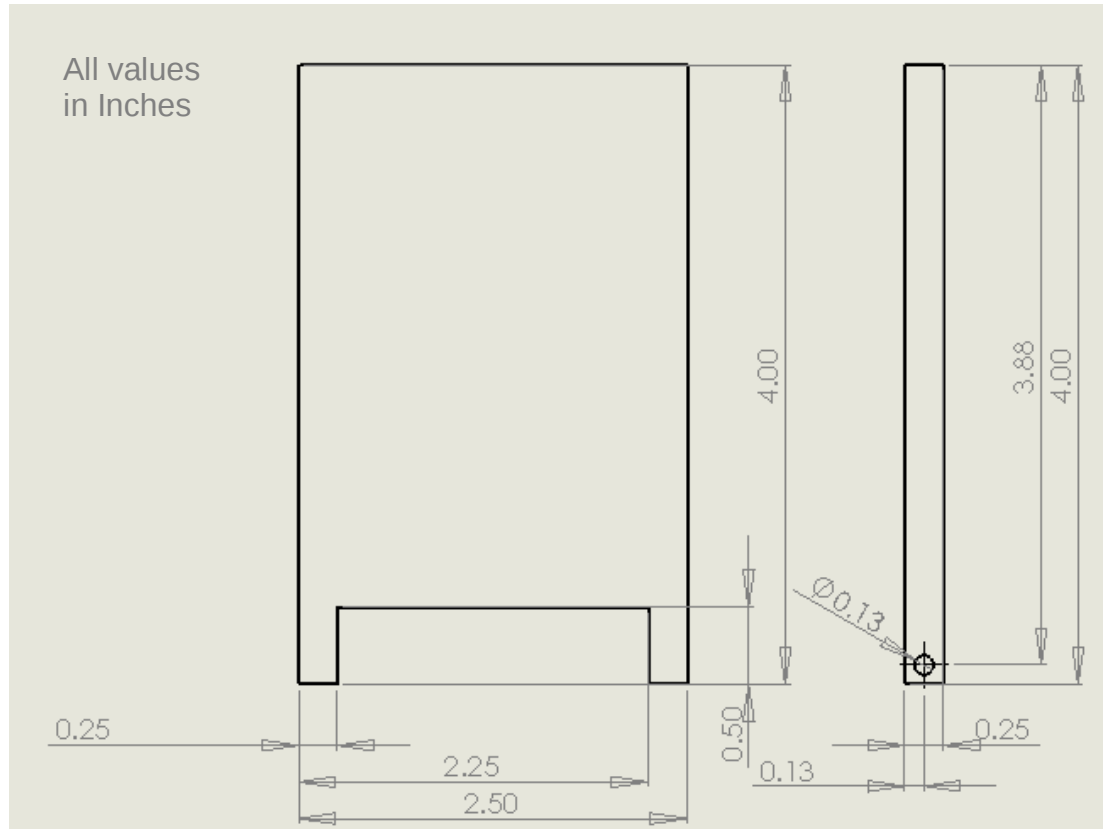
, Mode I Fracture Toughness Loading Clevis Geometry.
